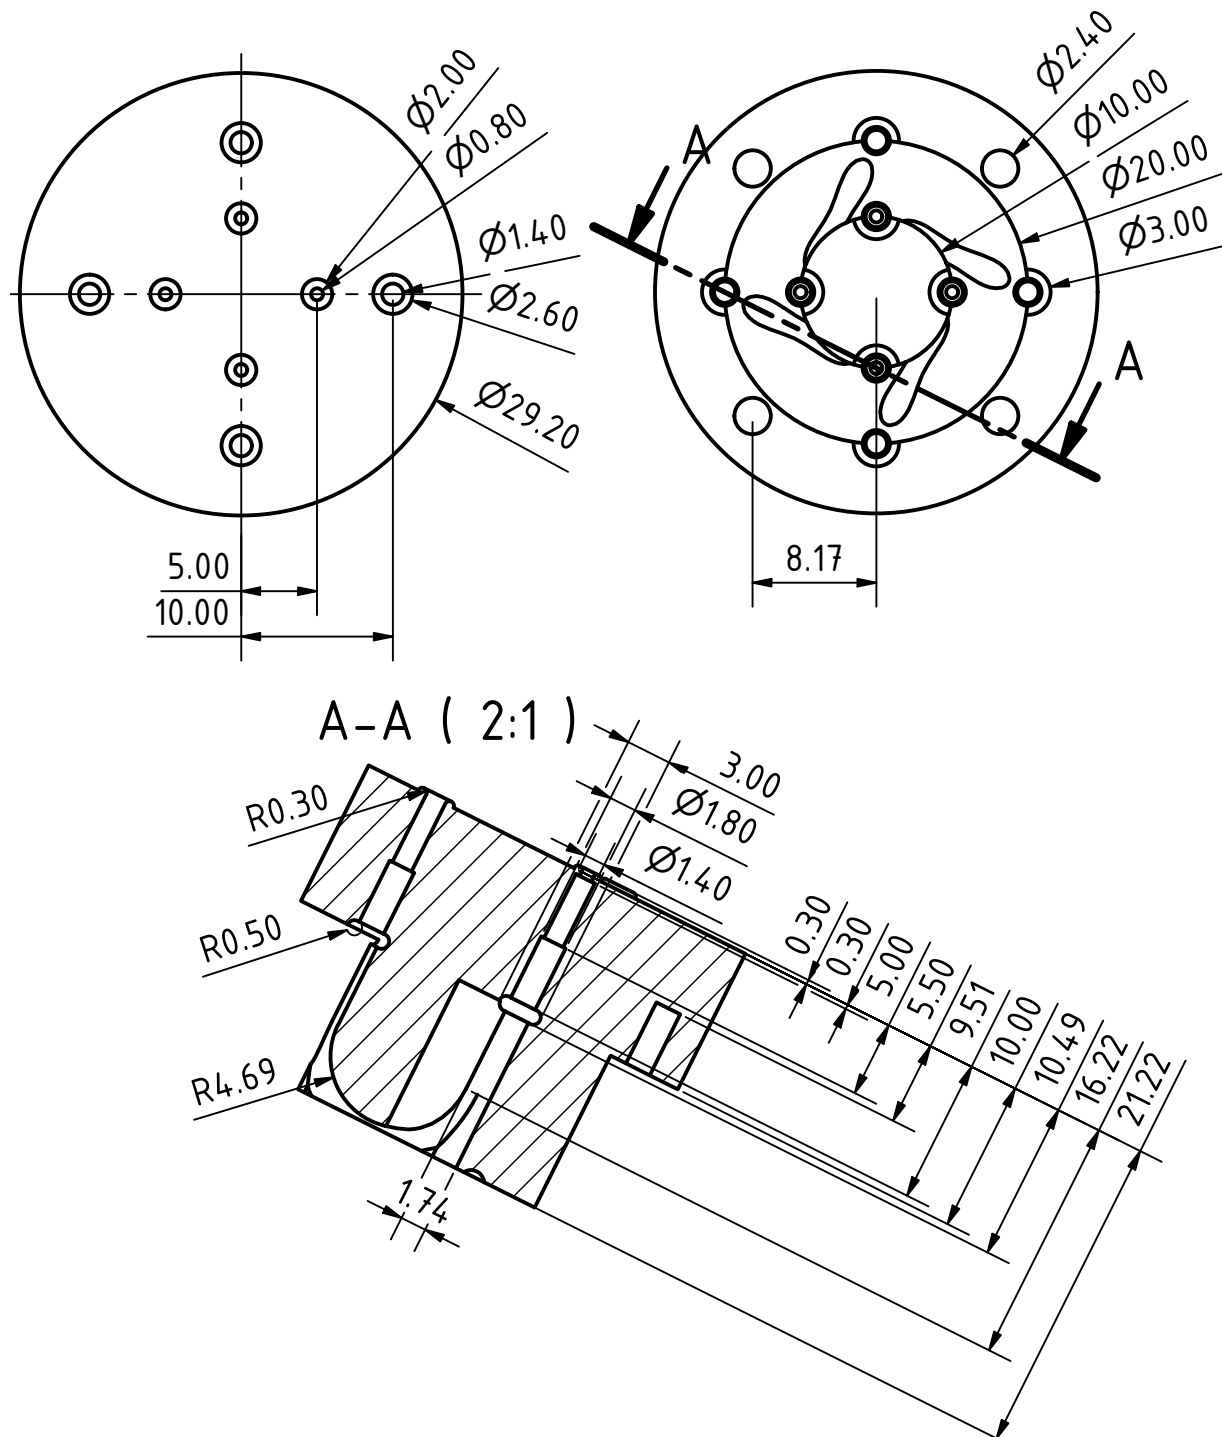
Technical drawing of the rotor (part 1) of the integrated valve system: bottom view (top left), top view (top right), and section view (bottom) with scale 2:1. All dimensions in mm.
